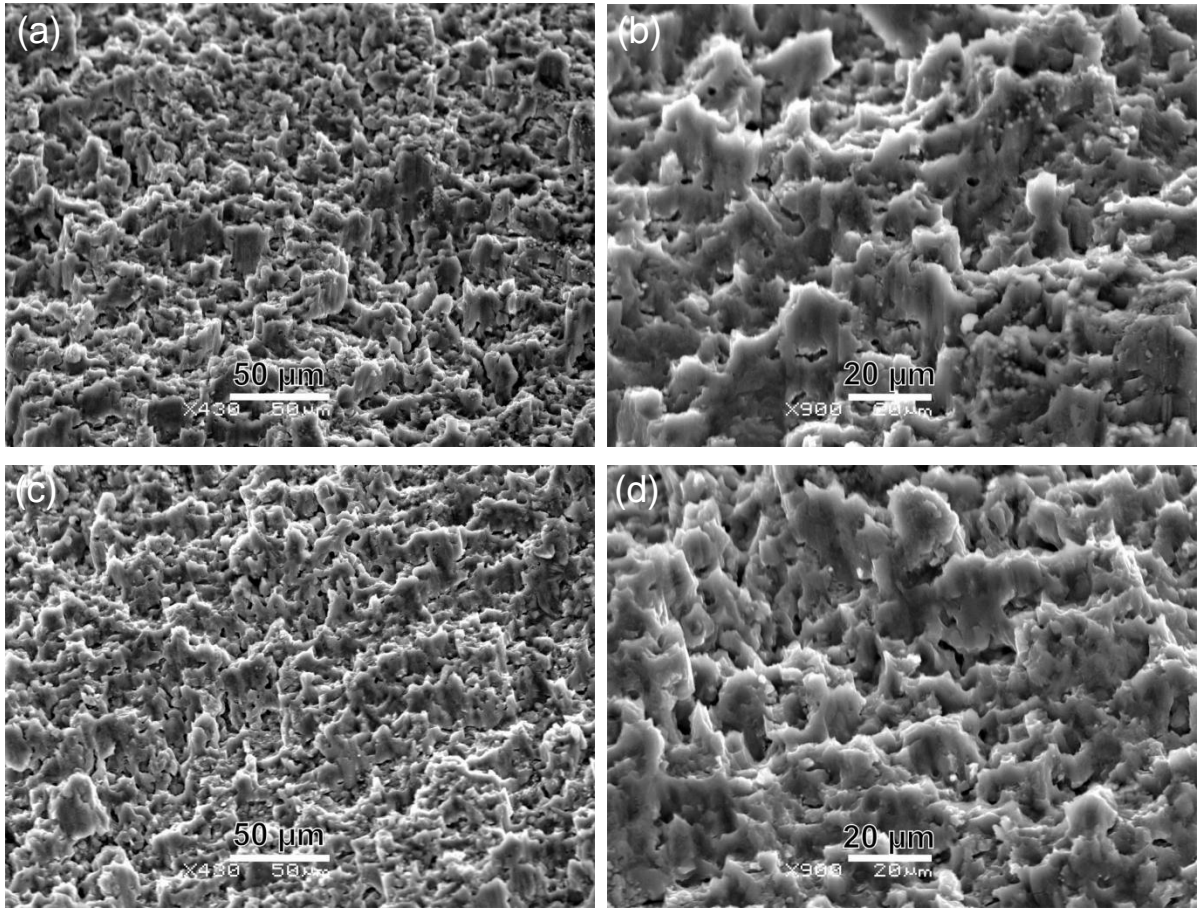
SEM images of typical fracture surfaces after the tensile shear test, (a) and (b) fusion zone side at different magnifications, (c) and (d) steel side at different magnifications.
